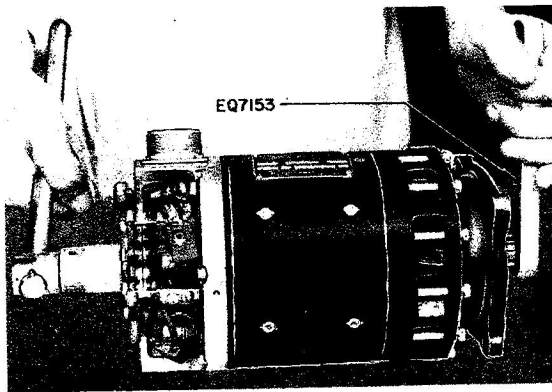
Removal of Nut at Commutator End of Armature Shaft for Partial Disassembly of Generator After Test Runs
